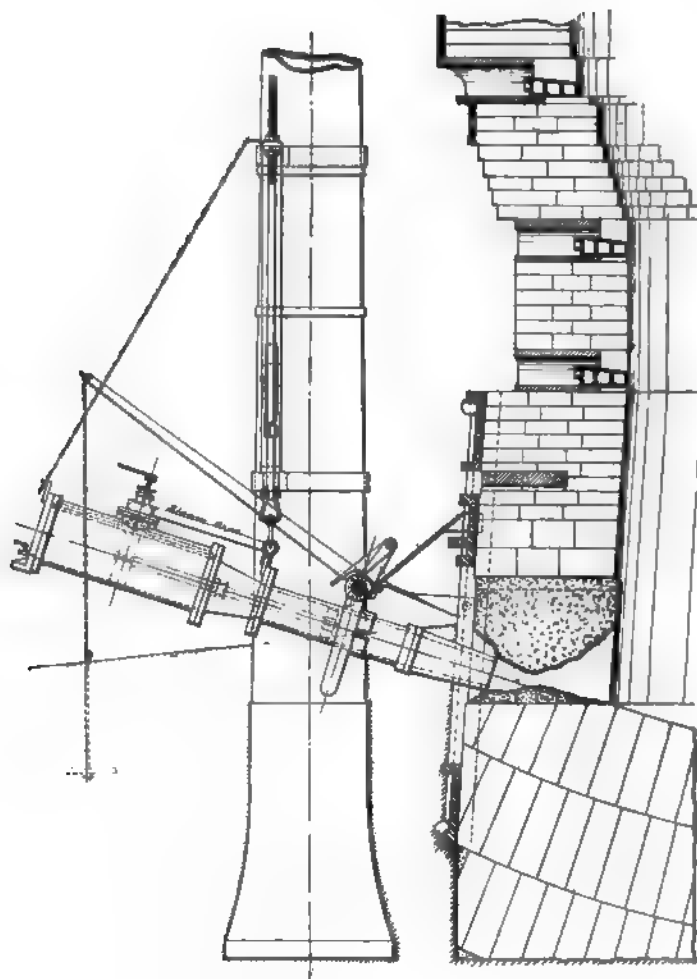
VAUGHEN'S TAP HOLE CLOSING MACHINE, IN POSITION READY FOR WORK.
